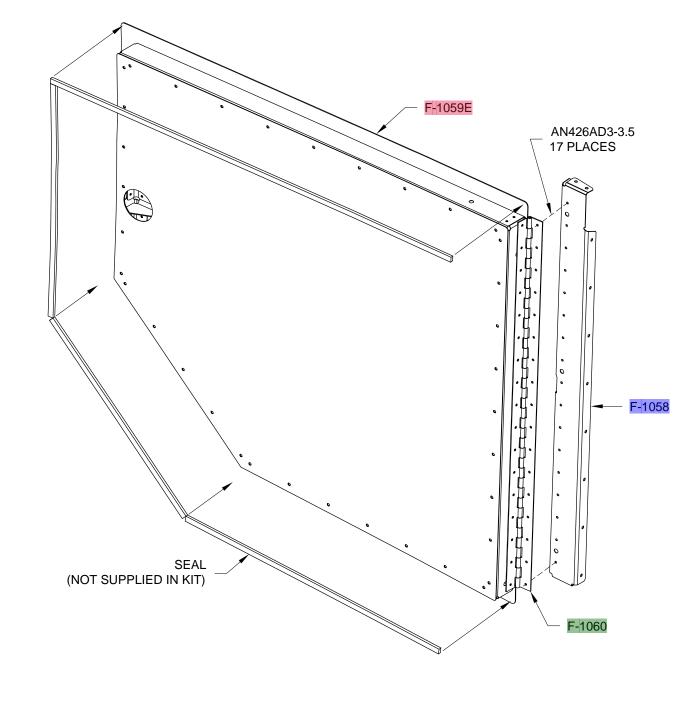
ATTACHING THE HINGE FRAME AND SEAL
